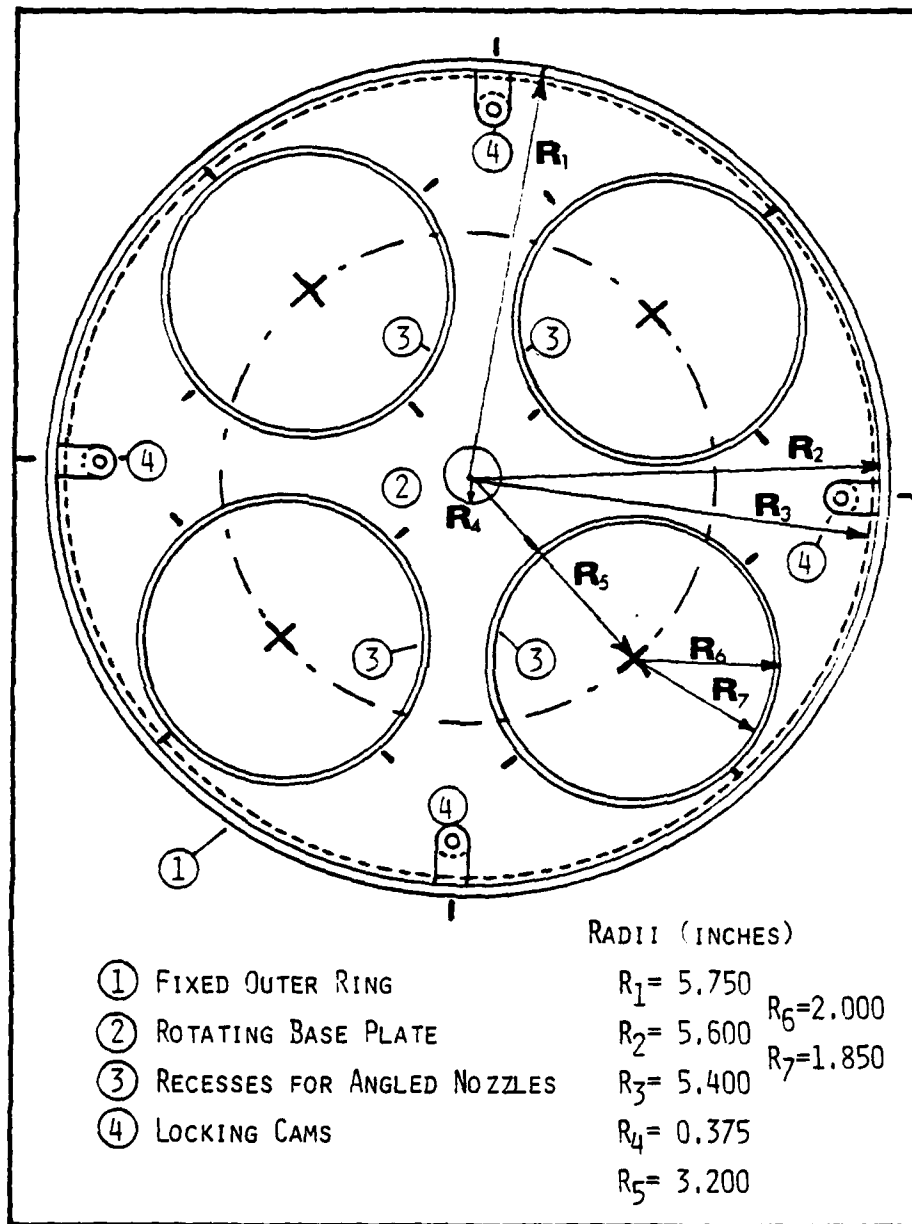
Dimensions for the Rotatable Nozzle Base Plate
